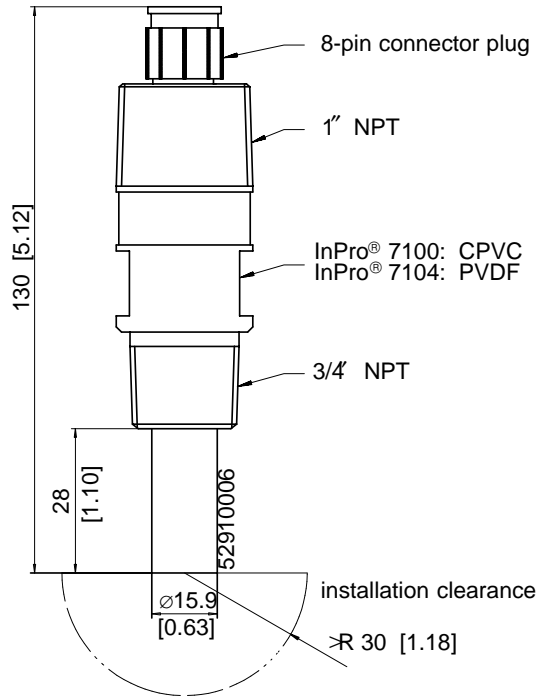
Dimension drawing InPro® 7100 / 7104 4-electrode cell
